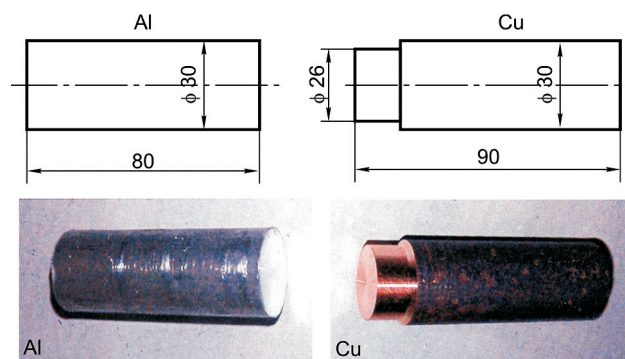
Initial dimensions of samples made of Al and Cu for friction welding [7]
